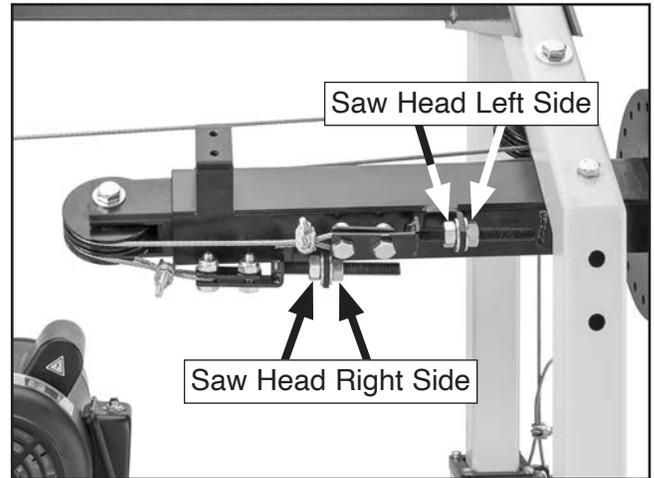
Location of saw head leveling bolts (switch panel removed for clarity).
